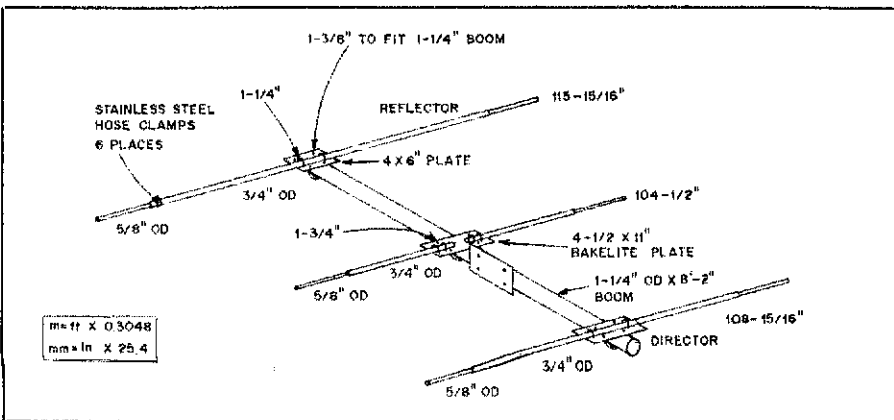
Dimensional drawing of the 3-element, 50-MHz Yagi described in the text.
